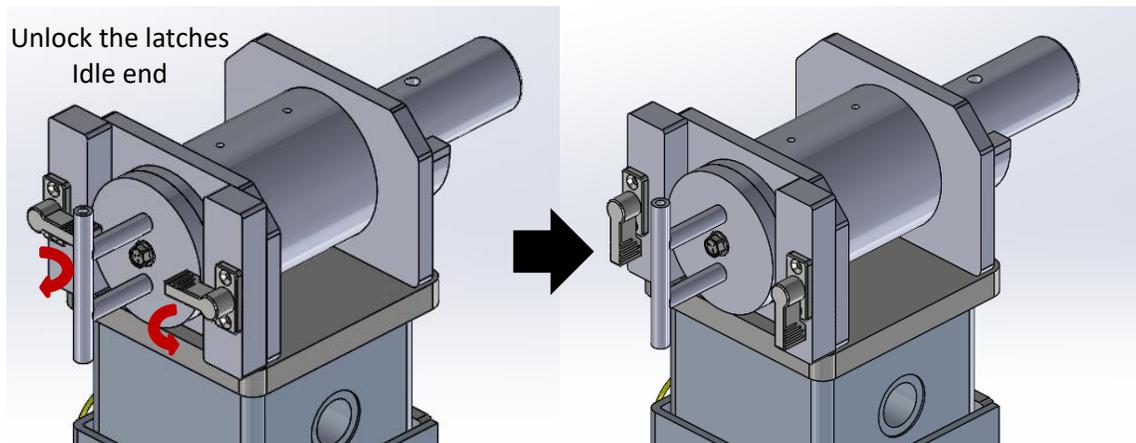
Operating Procedure for Welding Fixture Changeover, Unlock Safety Latches, Idle End
